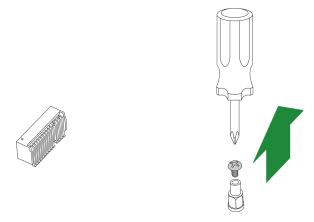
Removing the Screw on the Pre-Installed Standoff
